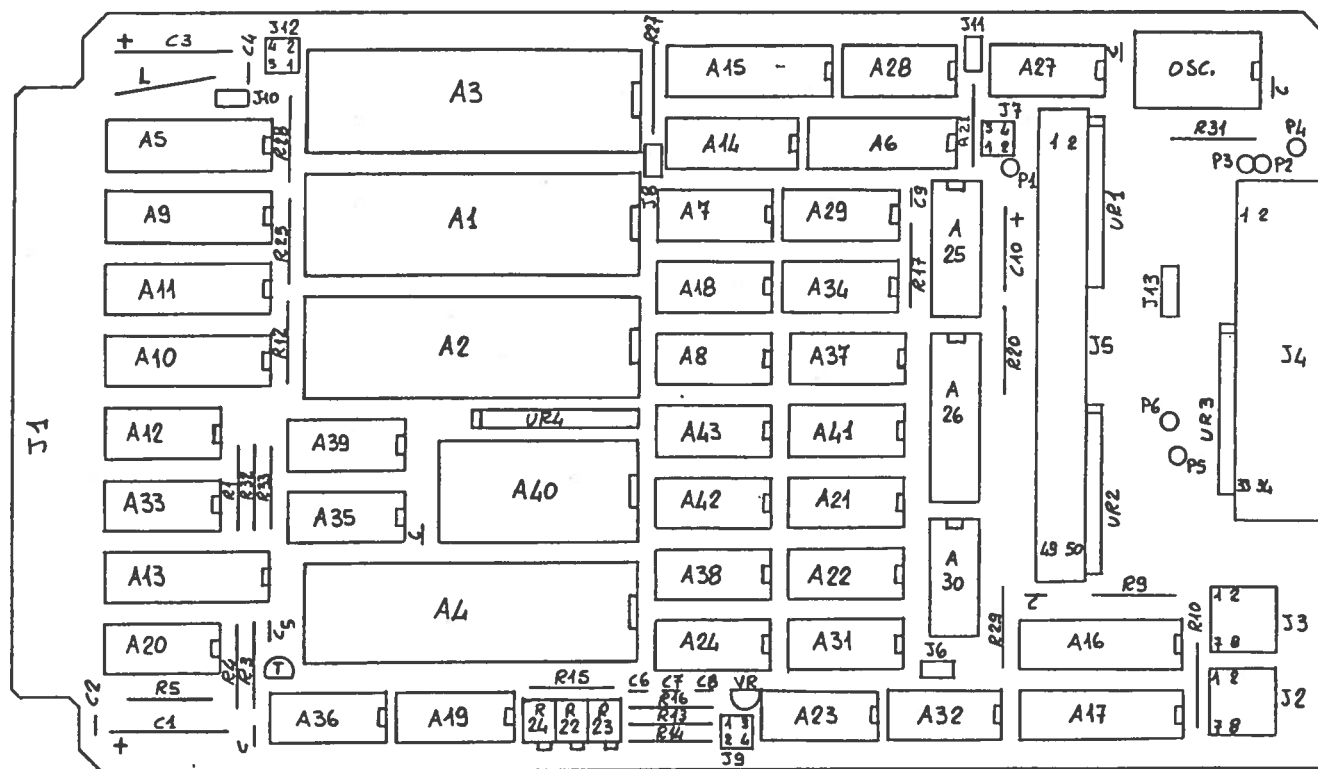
COMPONENTS AND JUMPER CONNECTORS LAYOUT OF DISK CONTROLLER BOARD.
